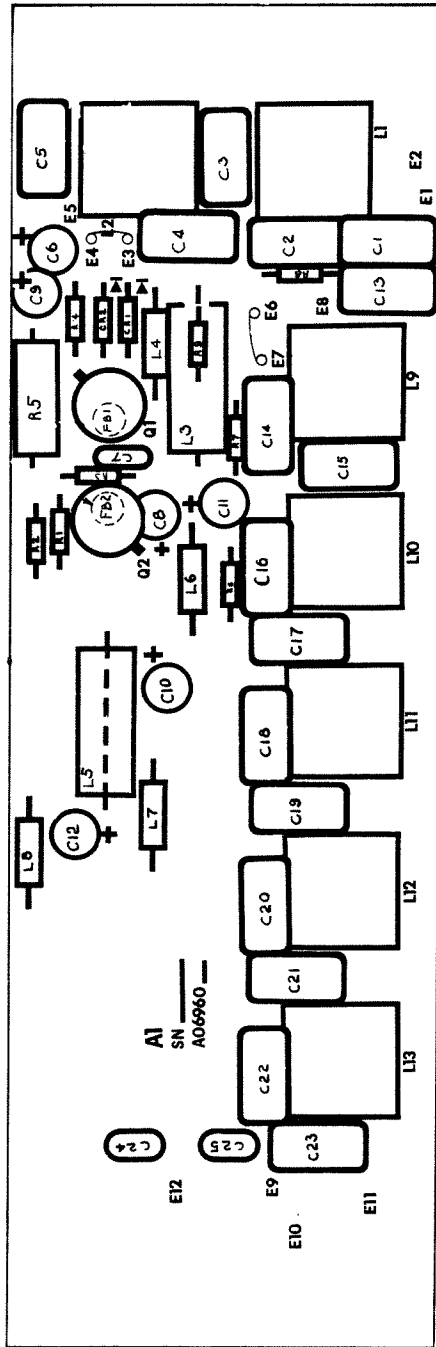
B RF Amplifier A1, Circuit Card Assembly
